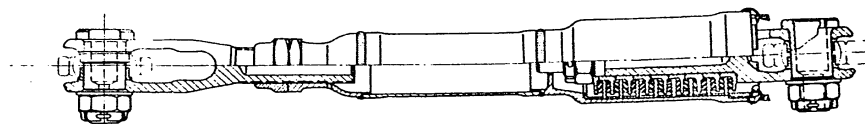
ADJUSTABLE STRUT FOR ENGINE ATTACHMENT IN FRONT ZONE.
